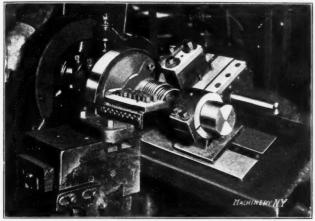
Turning, Boring and Cutting-off Piston Rings in a Gridley Machine
